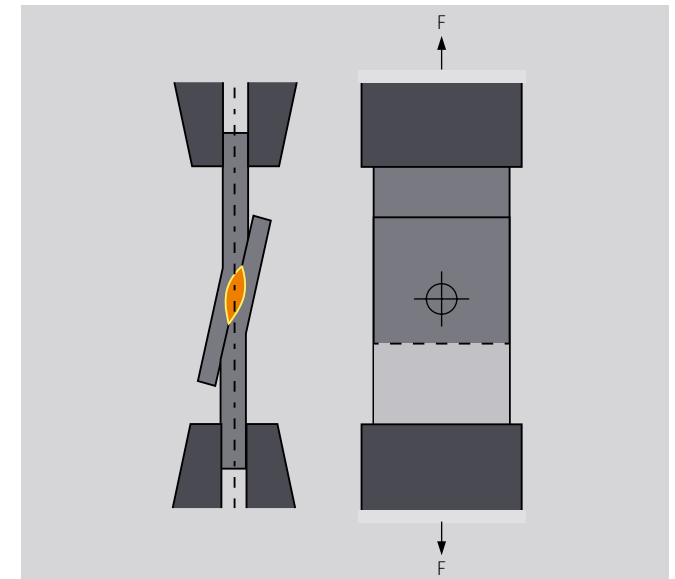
Shear tension testing of a spot weld.
